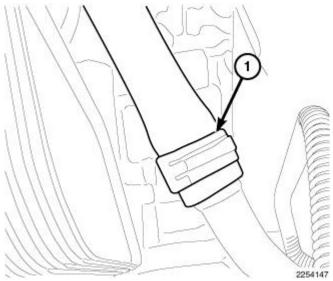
Engine Oil Coolant Hose Courtesy of CHRYSLER LLC
